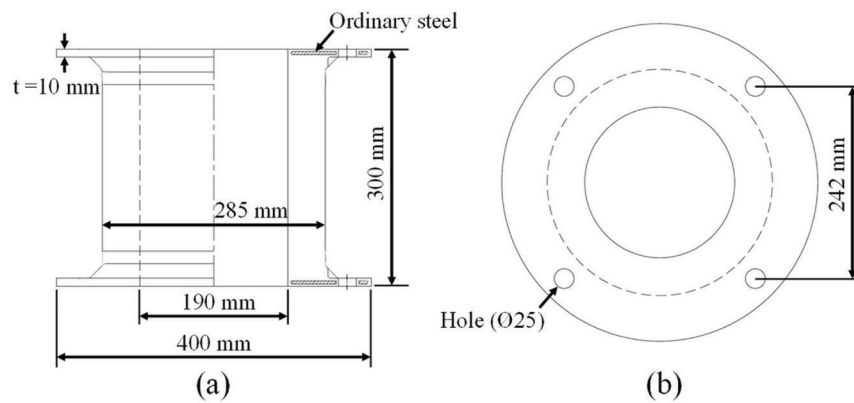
Dimensions of the circular tube-shaped rubber fender crushing test specimen: (a) front view, and (b) top view
